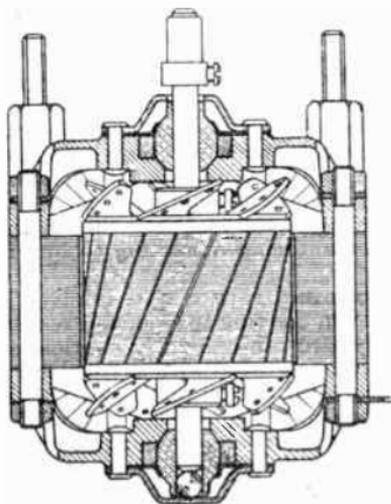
(above).—SECTIONAL VIEW OF OF A TYPICAL INDUCTION MOTOR USED ON GRAMOPHONE UNITS.
